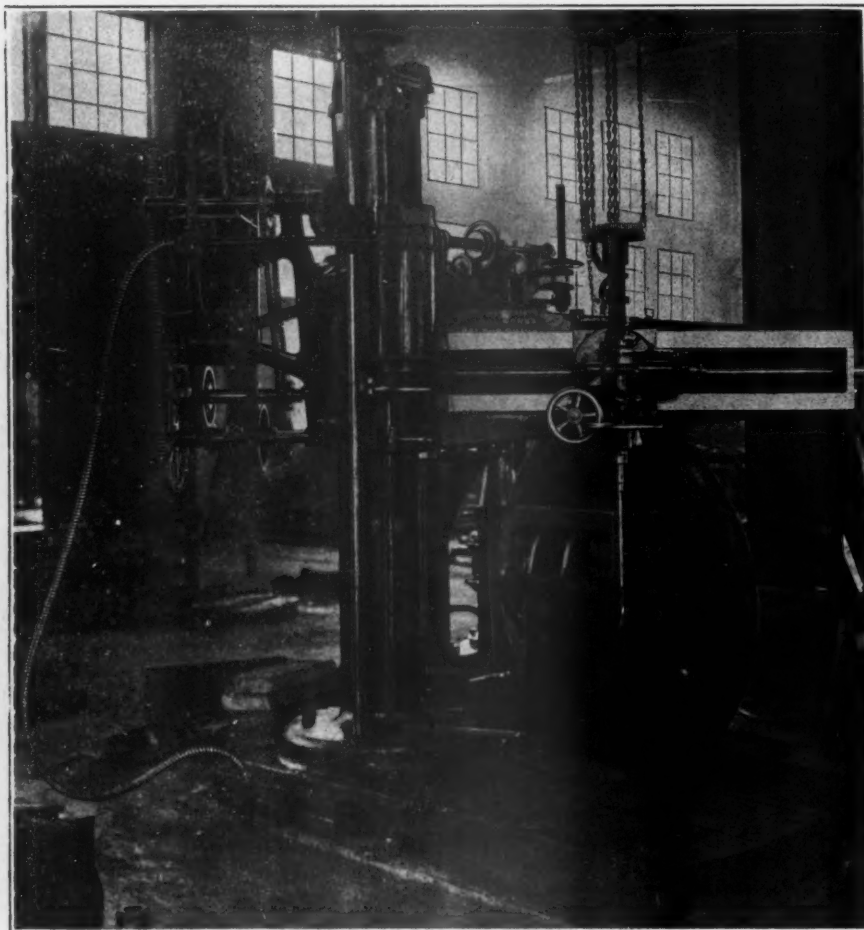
GENERAL VIEW OF THE NILES RADIAL DRILL AS EQUIPPED WITH THE INDIVIDUAL MOTOR DRIVE. CROCKER-WHEELER MOTOR AND CONTROLLER. McKEES ROCKS SHOPS.—PITTSBURGH & LAKE ERIE.
